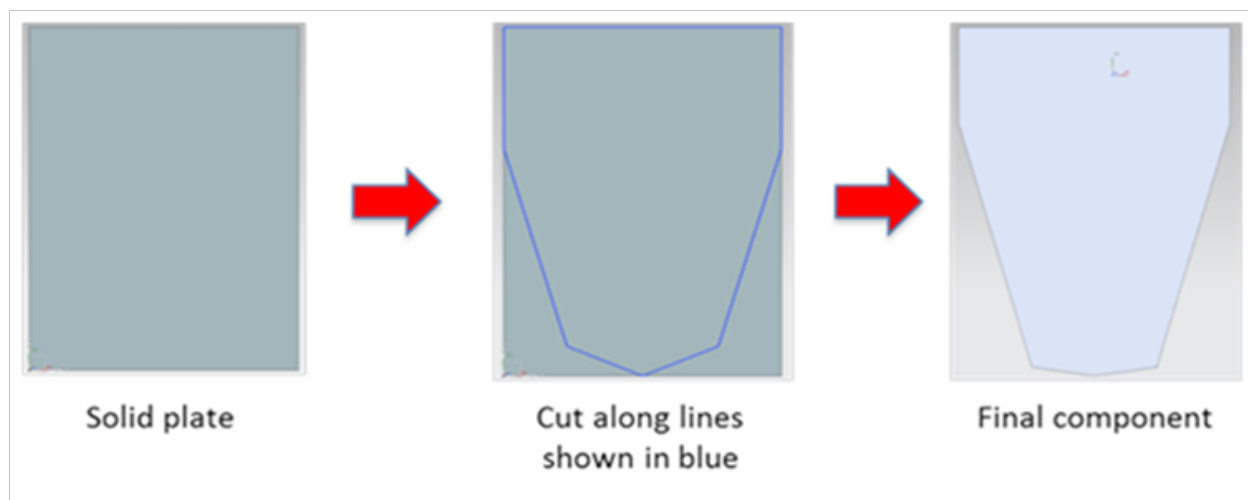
Manufacture of Back Plate Component in V-Hull Assembly
